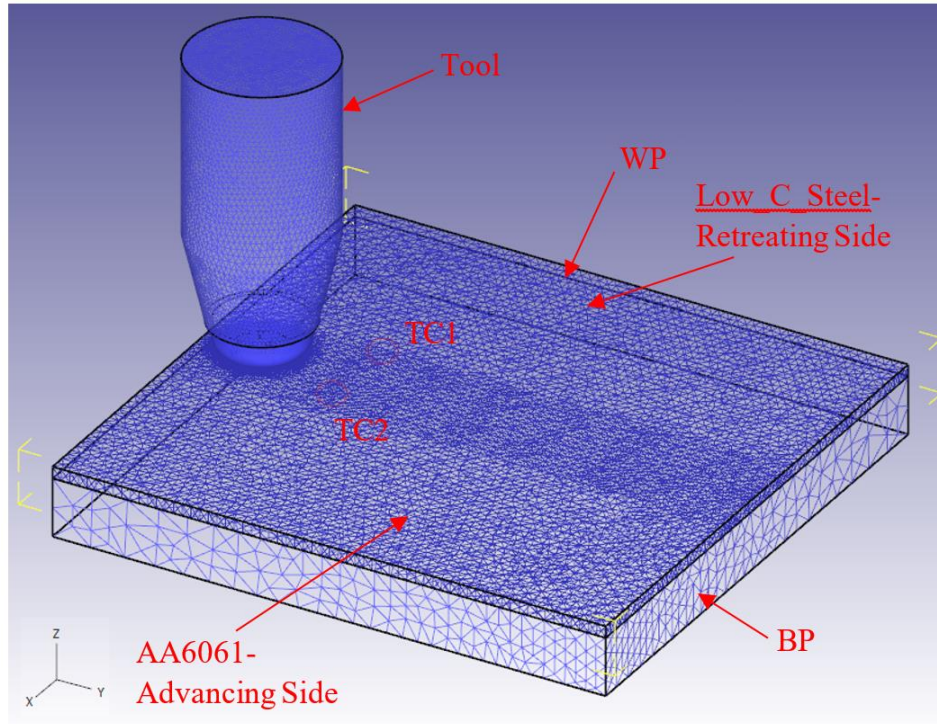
The FEM model showing meshed tool, workpiece (WP), and backing sheet (BP)
